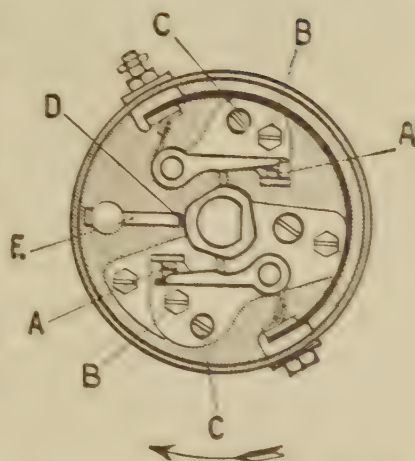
A Double Contact-breaker Unit used for Six-cylinder Engines.
